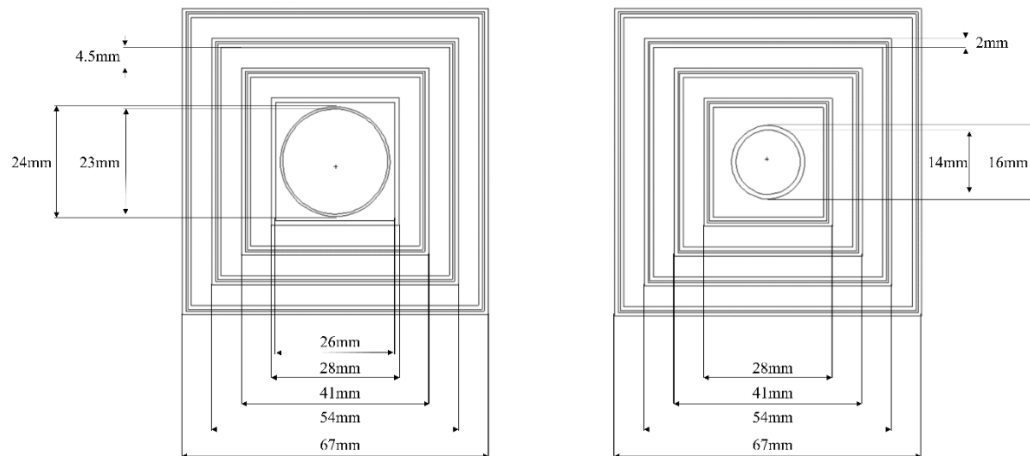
Cross section of IRT-2M (80wt%) fuel assembly (left: 3-tube, right: 4-tube)
